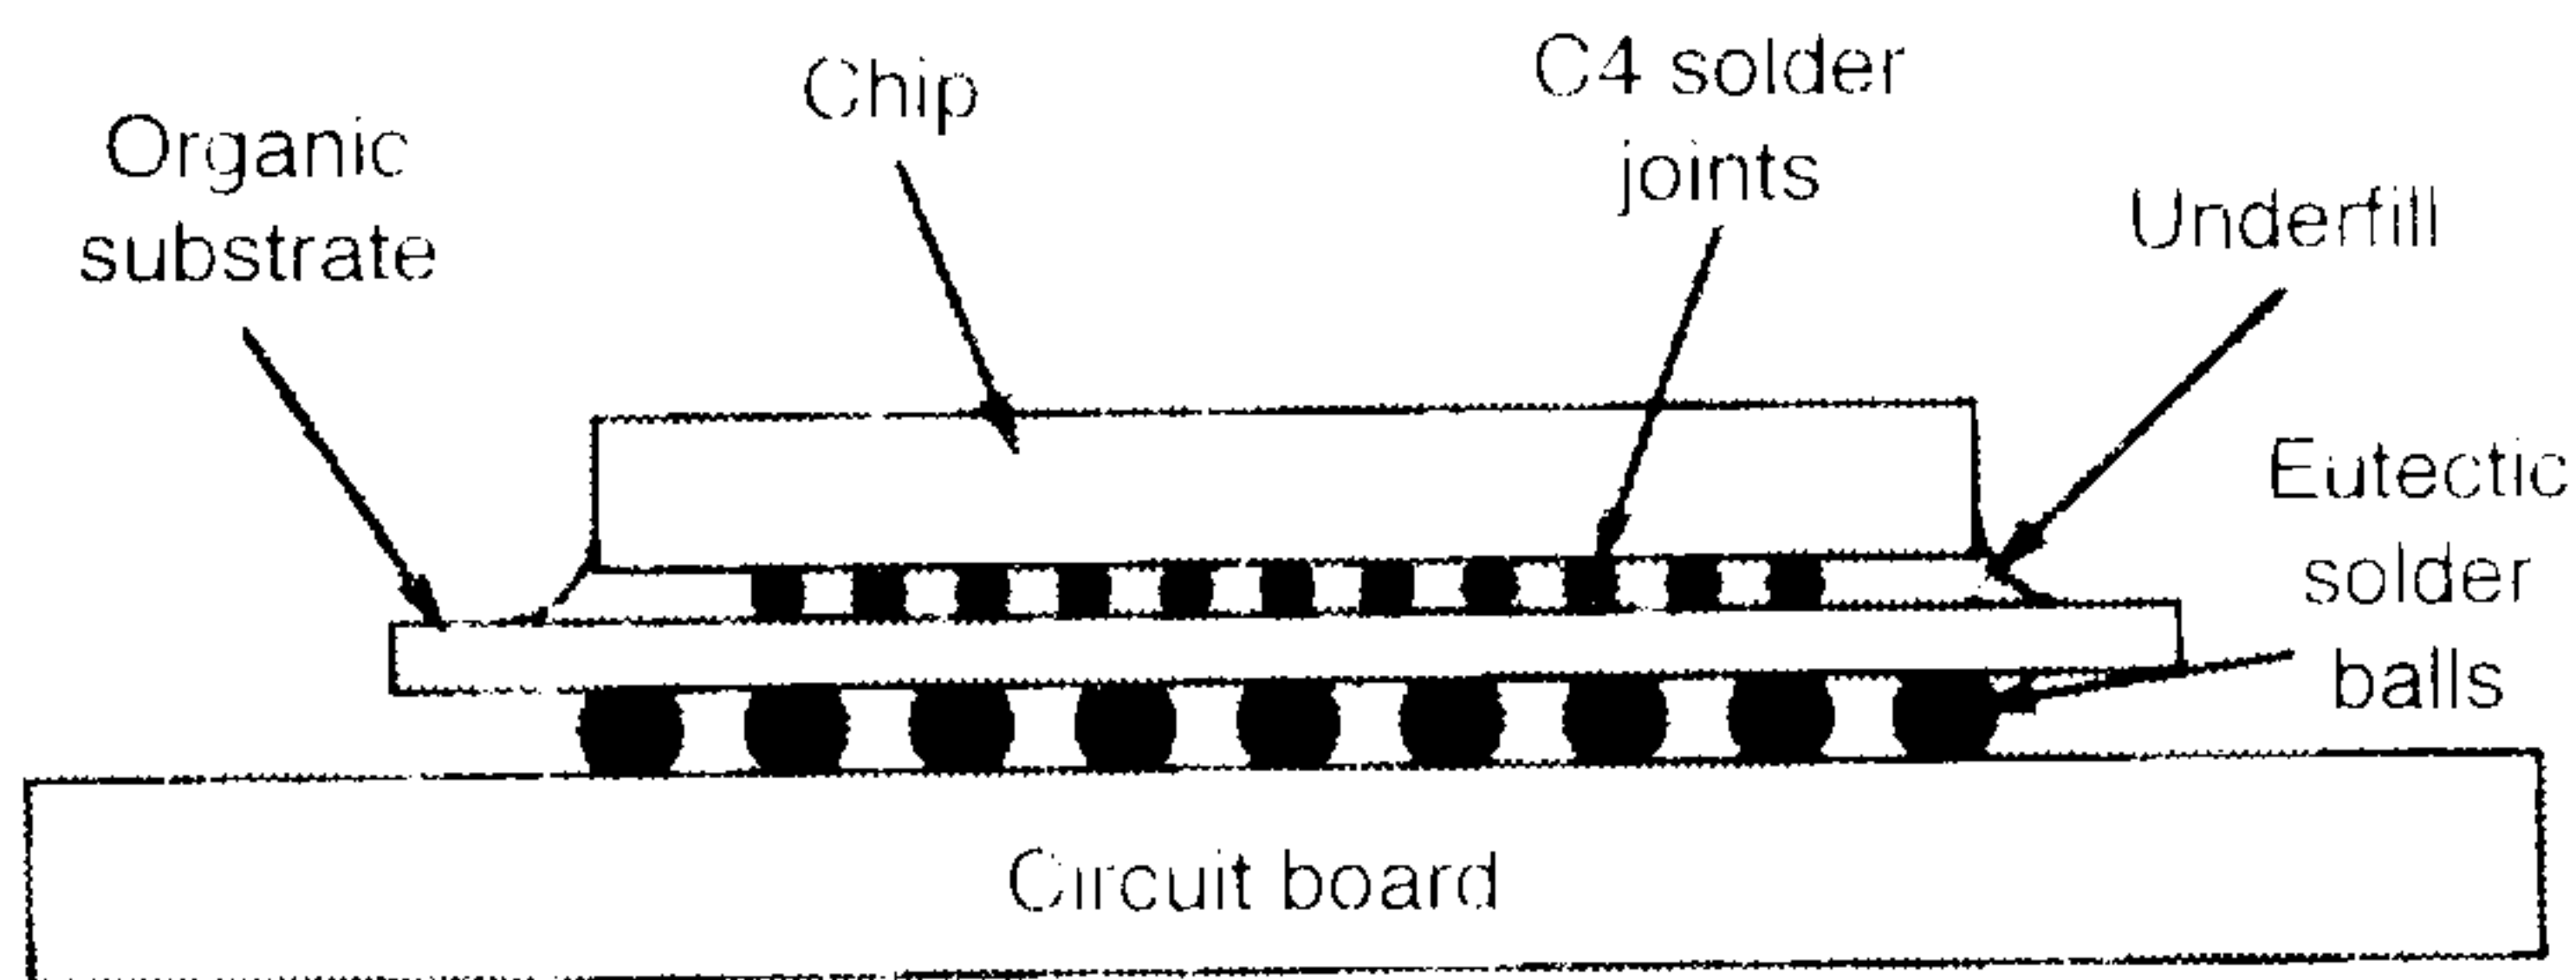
Design of Motorola's slightly larger than IC chip package using flip chip bonding.
